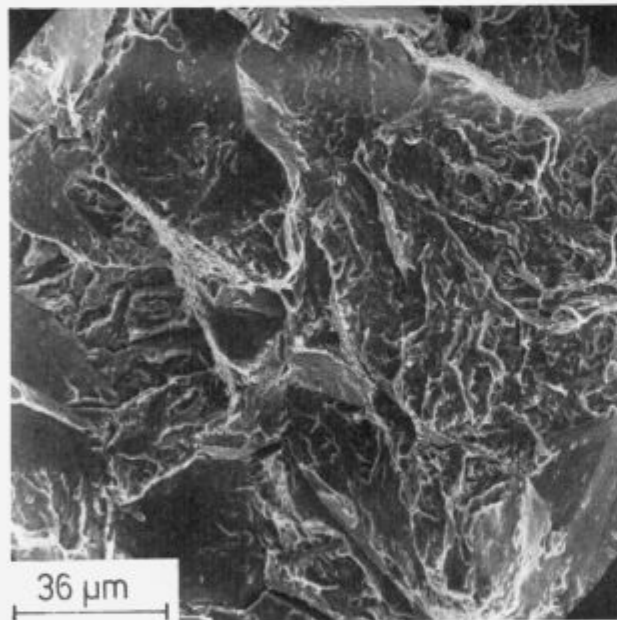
Fracture surface by a notch toughness of 22 J.
